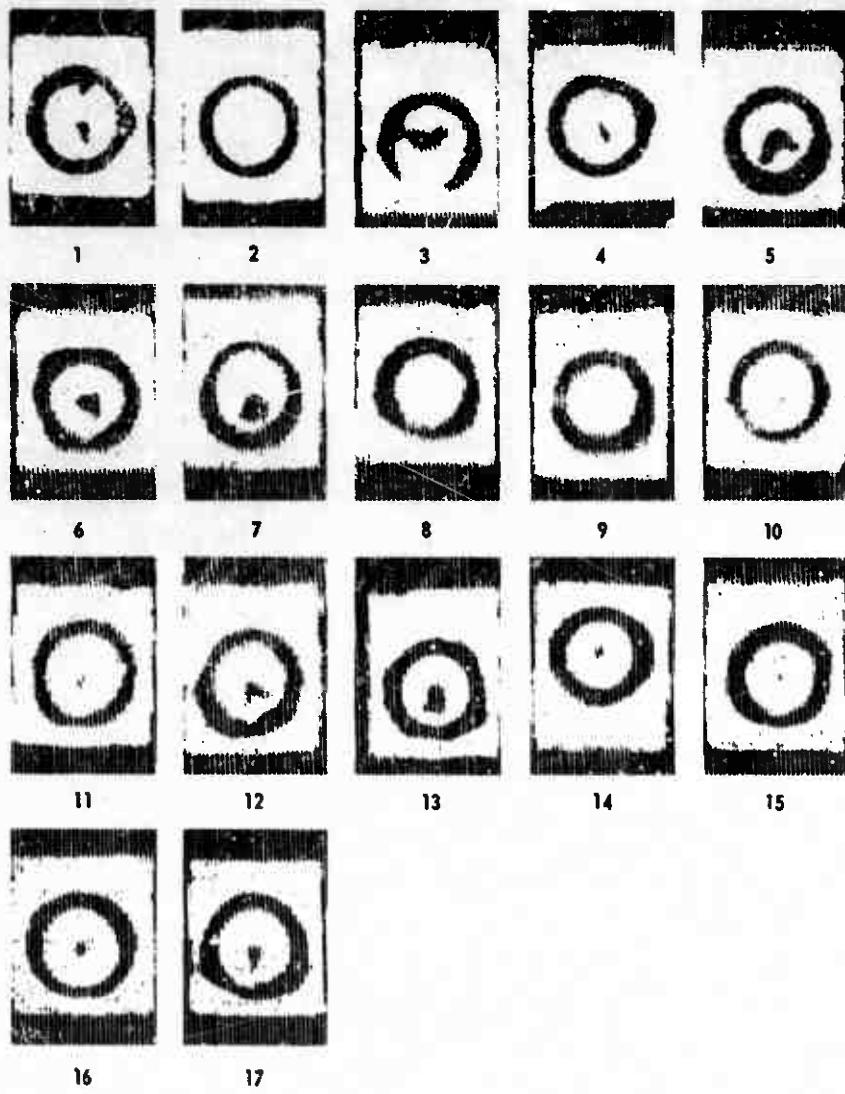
C-Scan Record of Series 12 Welds.
